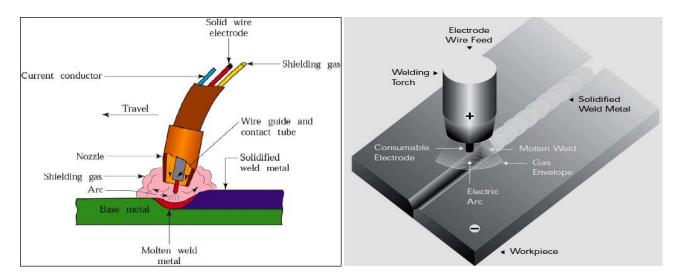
Working Principle of MIG Welding [1]
